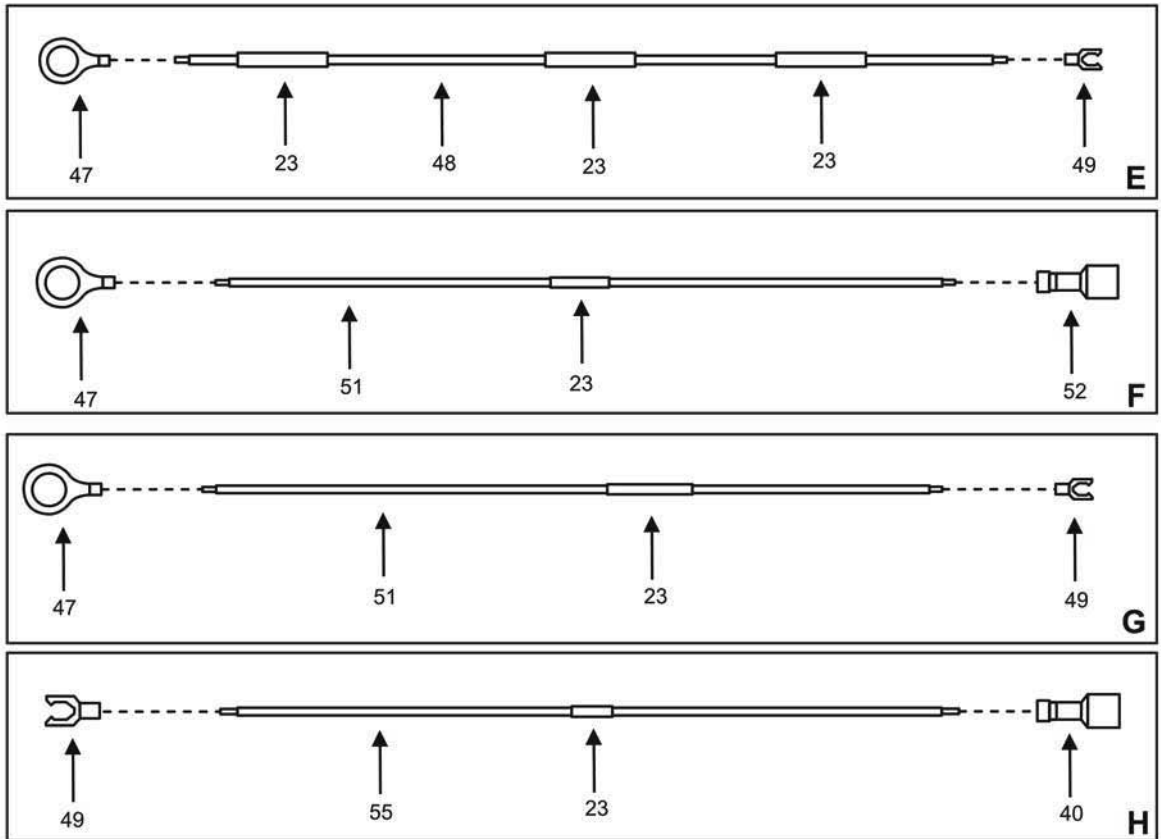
Convenience Receptacle Assembly (Sheet 6 of 7).
